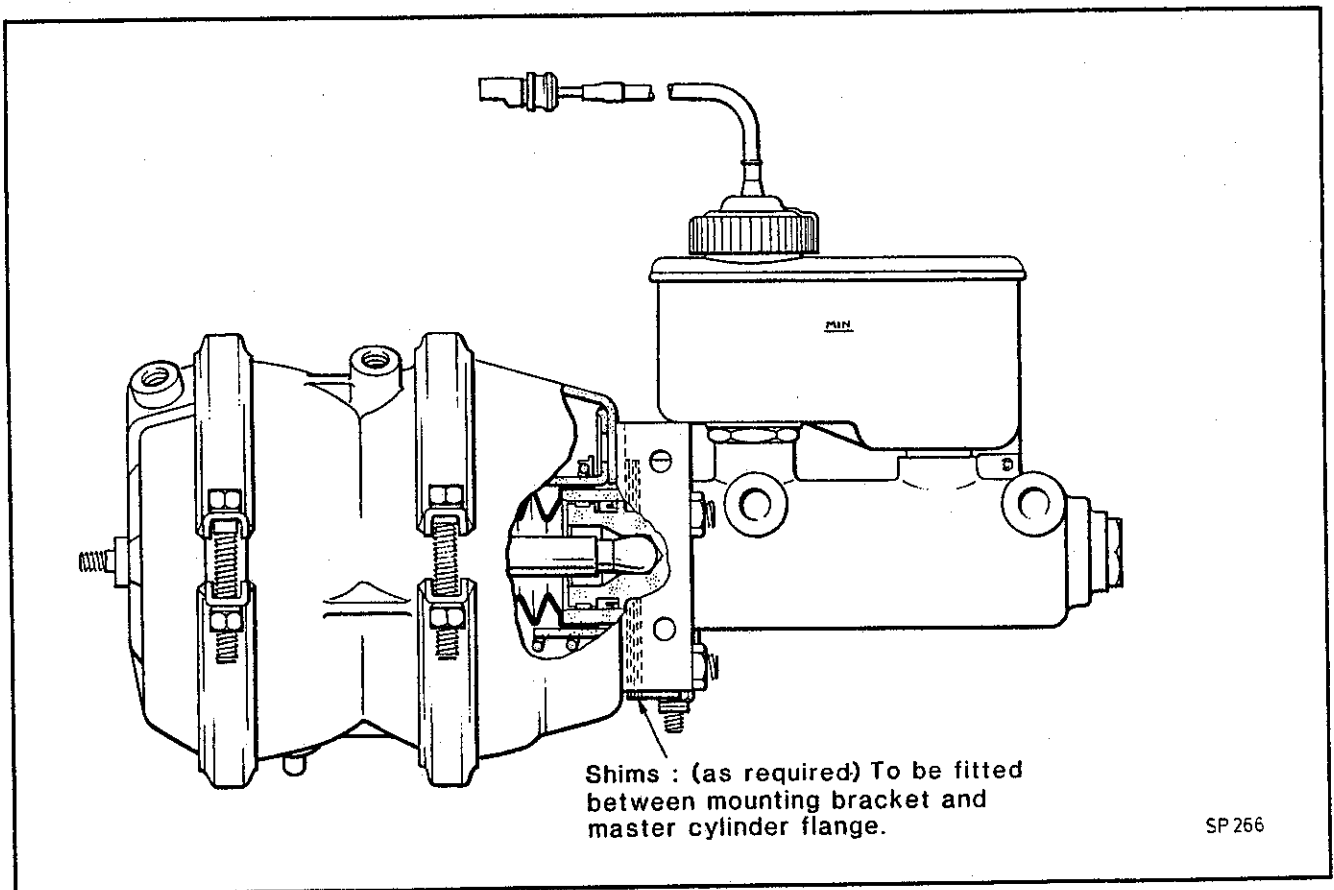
Assembly of Tandem Actuator and Master Cylinder
